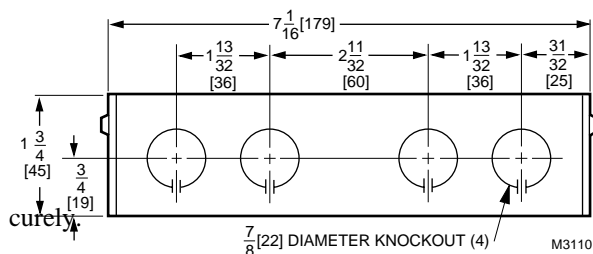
Front view of Q520A1089 and Q520A1121 Wiring Subbases with dimensions in inches [millimeters].
